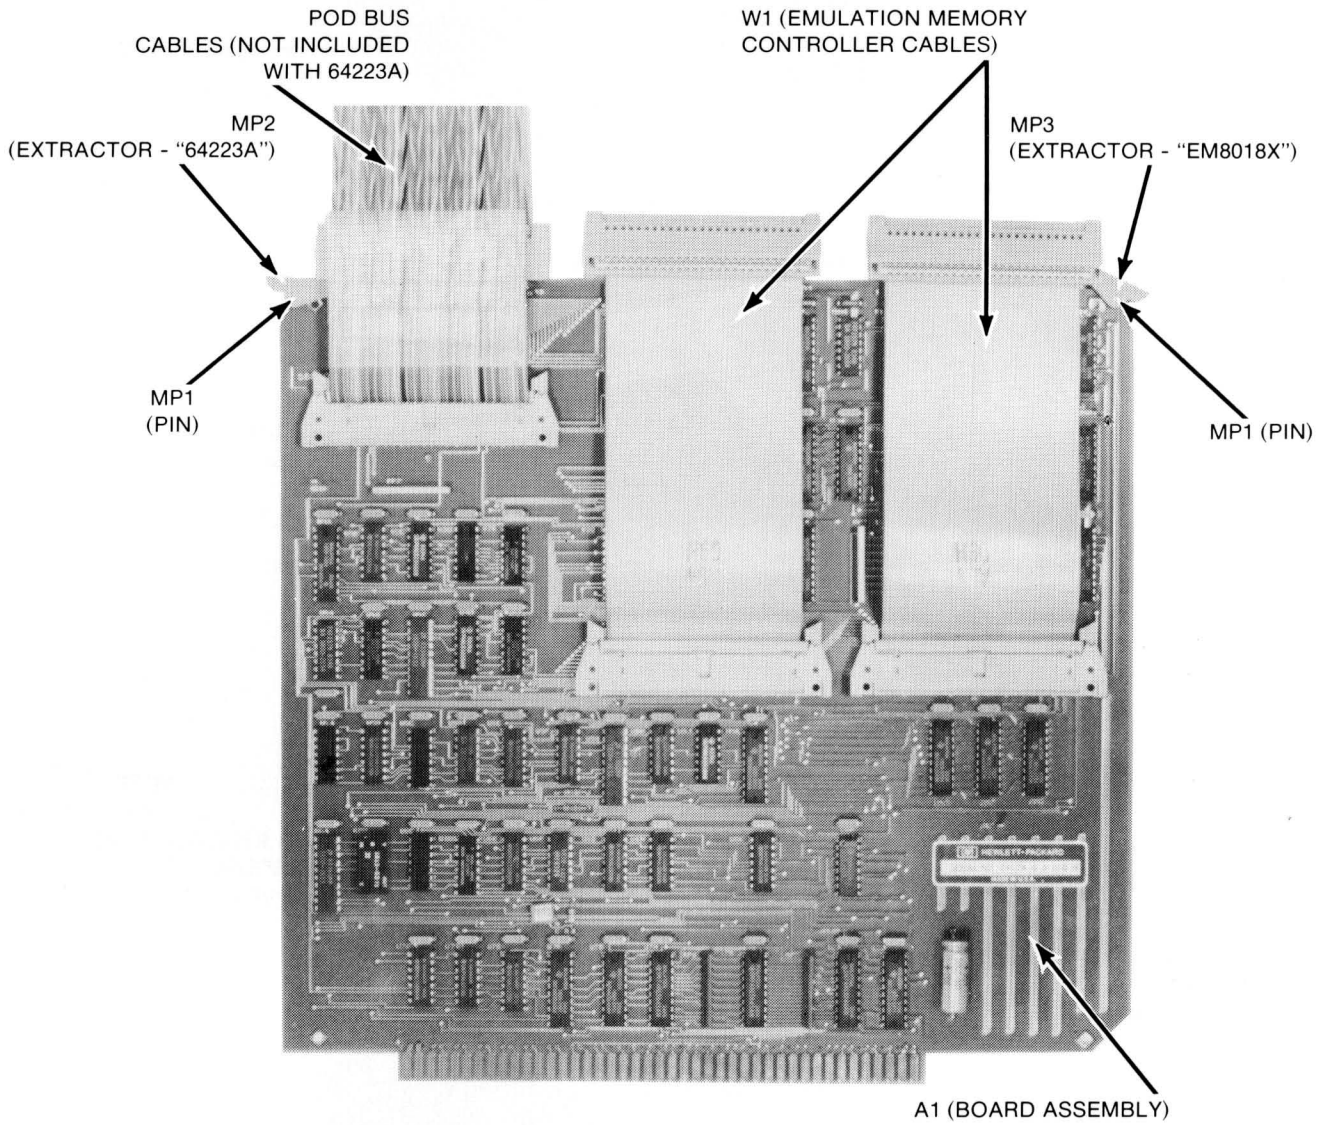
64223A 8018X Emulator Control Card Parts Locator
